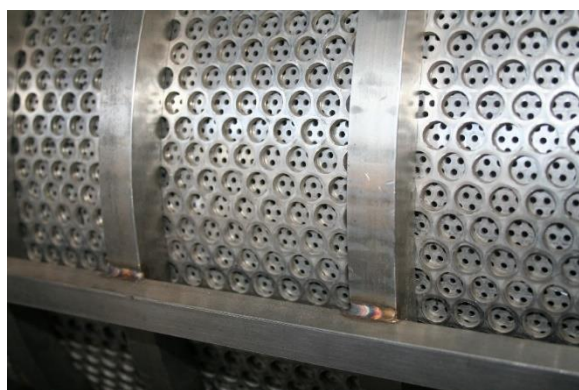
Screen Assembly for Screw Dewatering Press. A screw mechanism operating inside this screen assembly pushes organic material against the screen to dewater. Photo courtesy of <https://vincentcorp.com/content/operating-hints-cp-6-thru-cp-12-presses>
